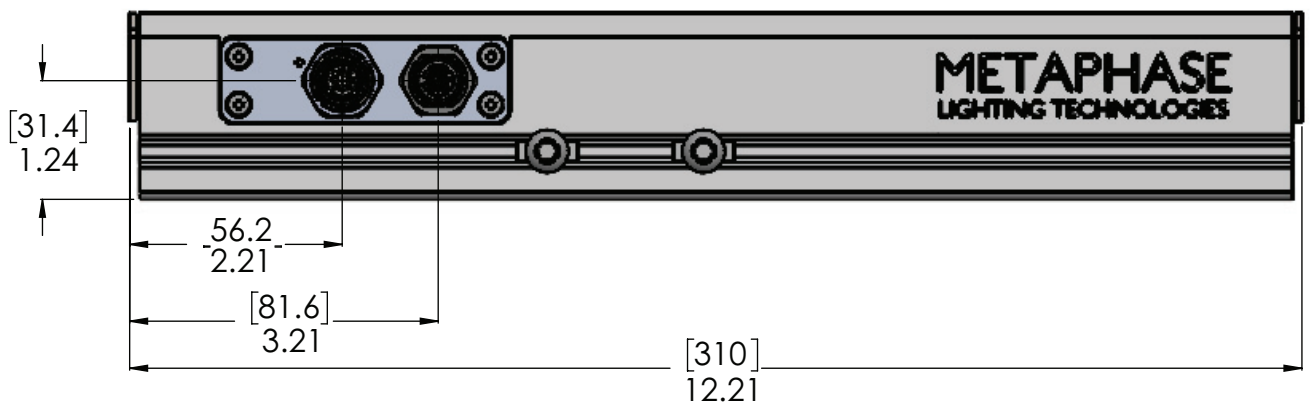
TXBR DIMENSIONS SIDE VIEW
